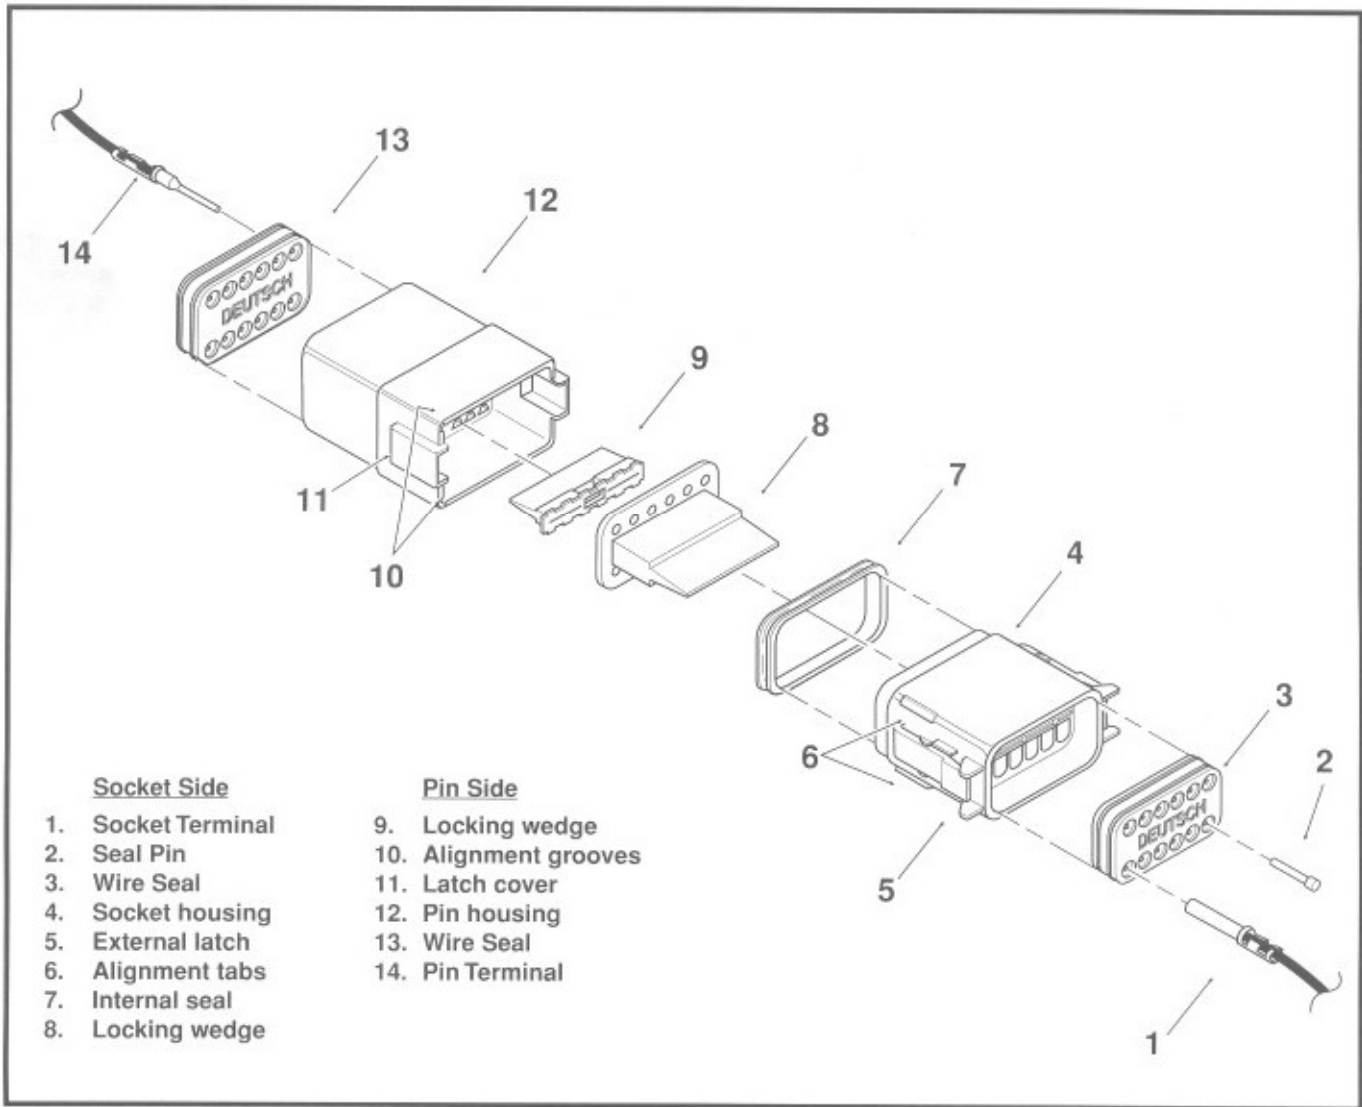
12-pin Deutsch Connector (Exploded View)
